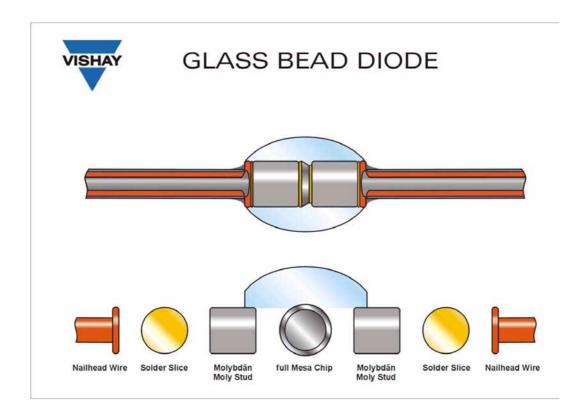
Components of a glass bead diode. The Mo pins are soldered on the nailhead wires (Copper). Afterwards the Mo pins are alloyed with the Si chip. Finally the diode is covered with a glass paste and sintered.
